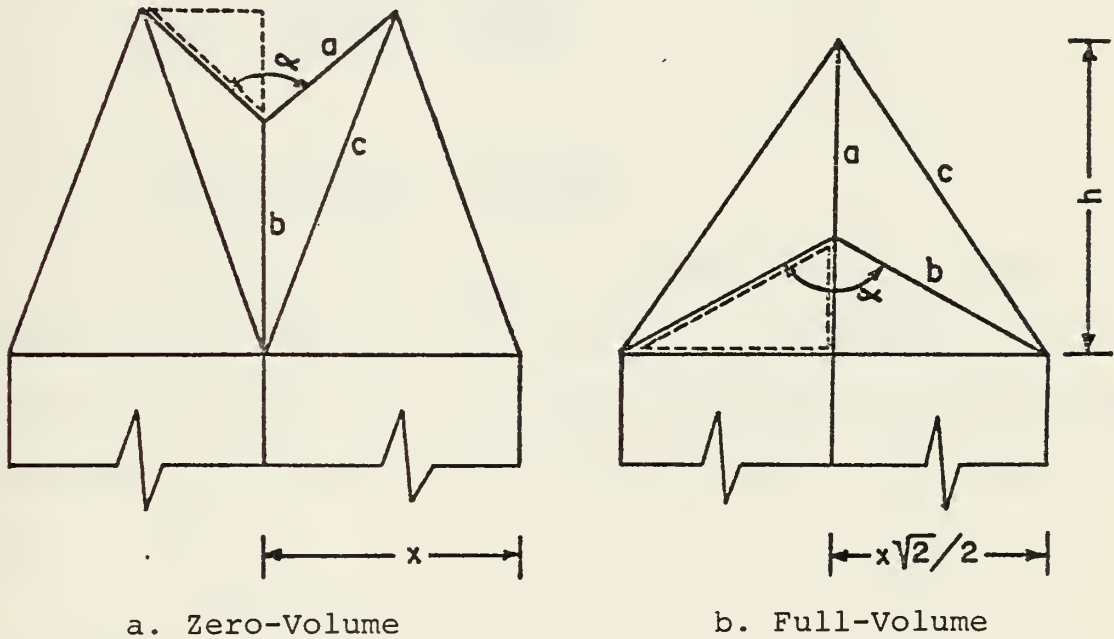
VGRB END SECTION DIMENSIONAL PARAMETERS
